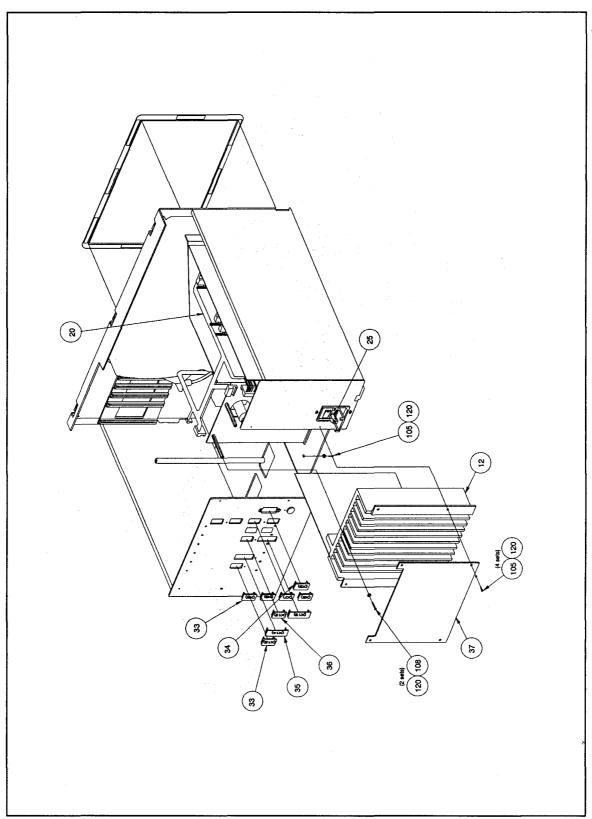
SIRECUST 1280/1281 Monitor Parts/Assembly (Sheet 4 of 5)
